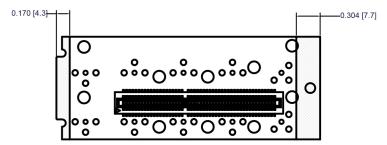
DFR-8321 Rear Module — Edge Plating on the Secondary Side
